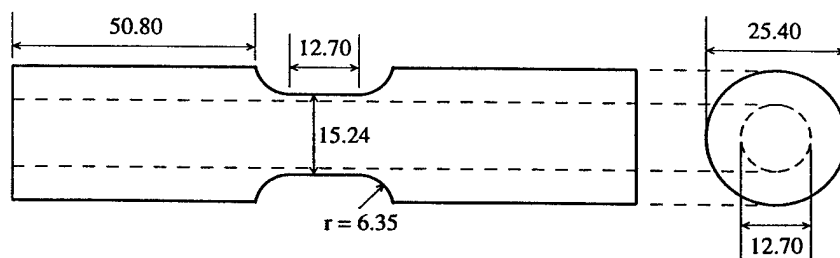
Details of thin-walled torsion-tension specimen. All dimensions are in mm.
